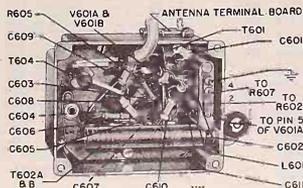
Bottom View of FM Tuner Sub-chassis. Location of components shown.
